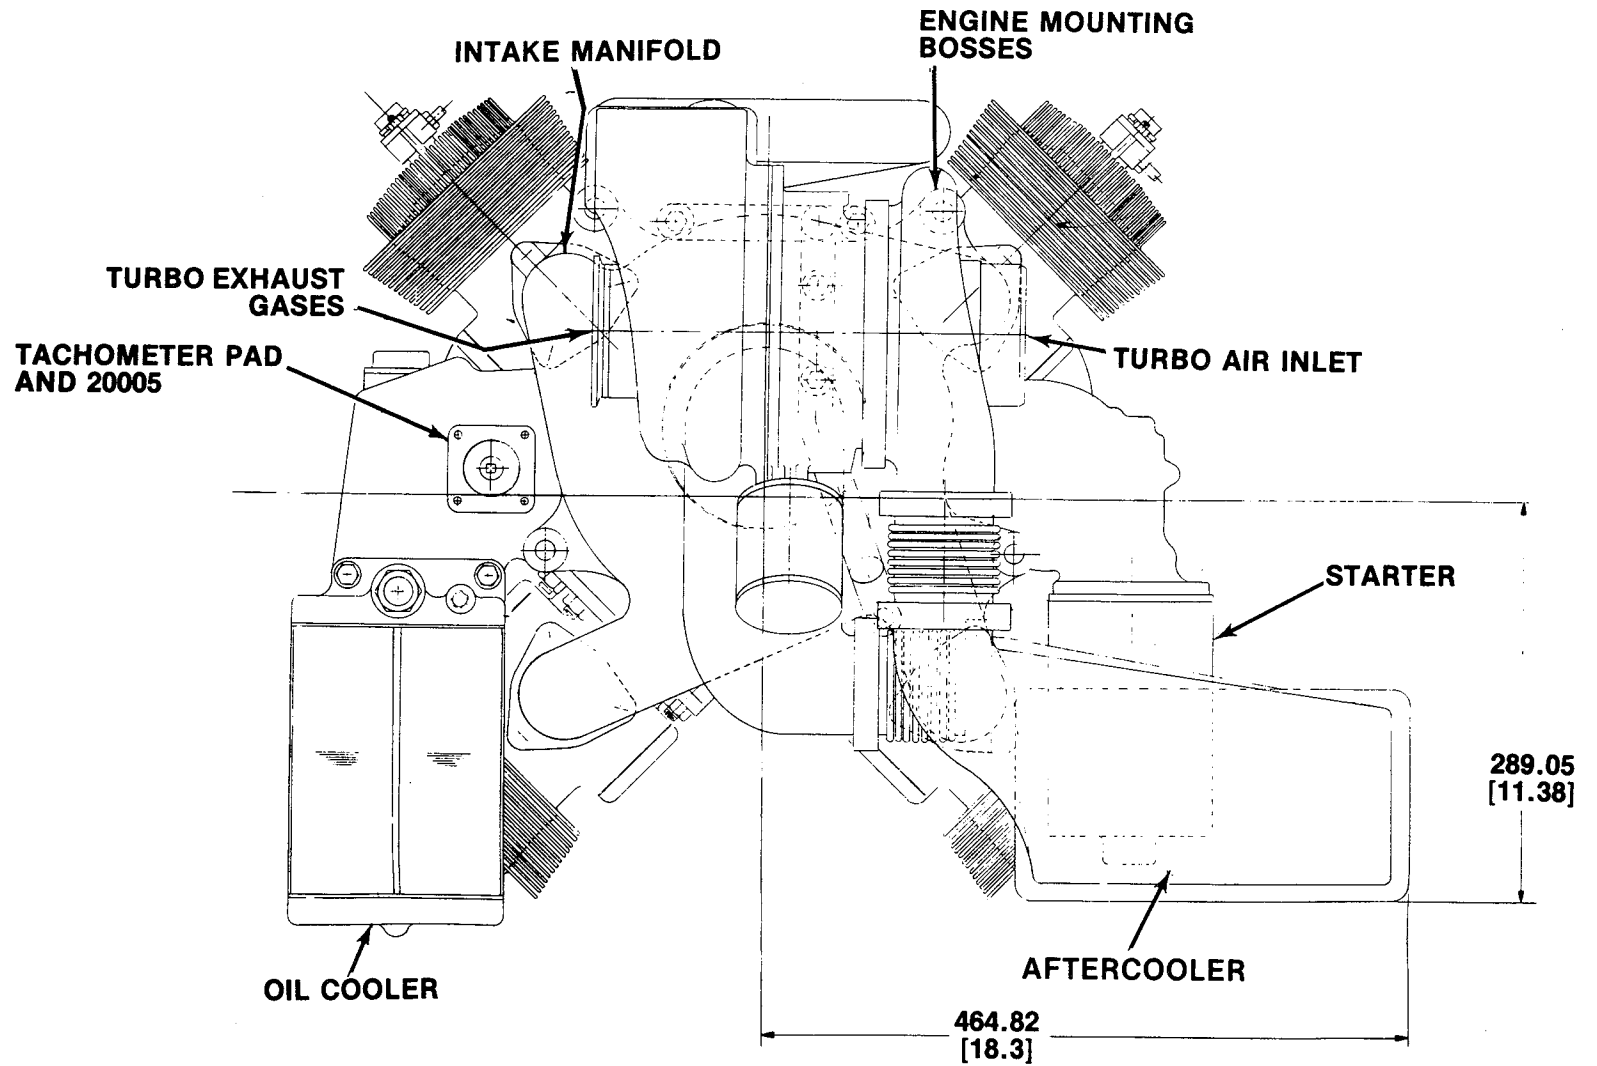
149 kW AIRCRAFT DIESEL—REAR VIEW
